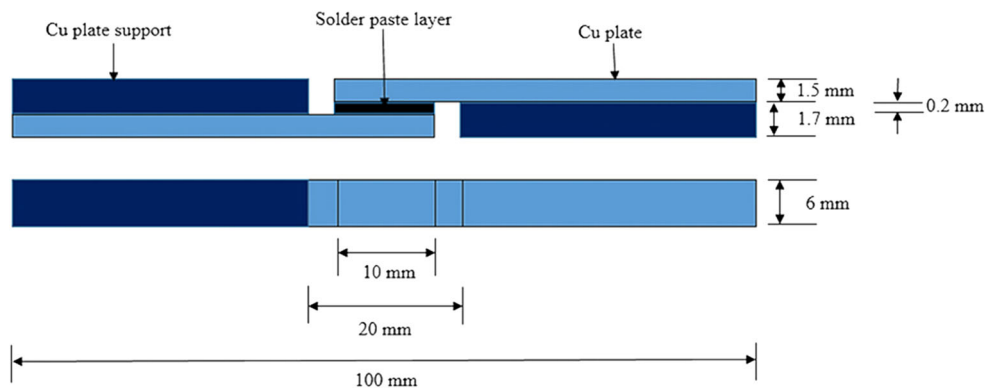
Schematic diagram of the micro-lap-shear solder joint assembly with copper plate support (front and top view)
